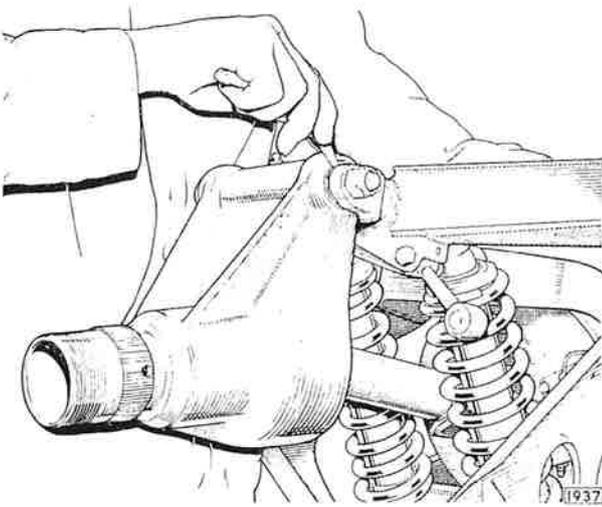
Using feeler gauges to measure the clearance between the hub carrier oil seal tracks and wishbone fork
